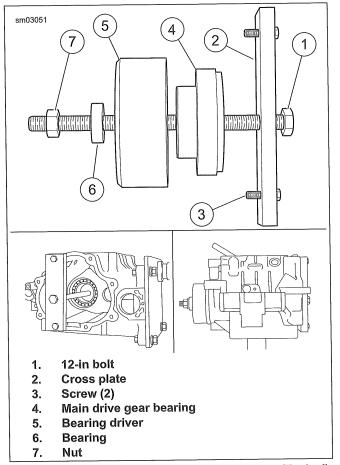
Installing Main Drive Gear Bearing (Typical)
